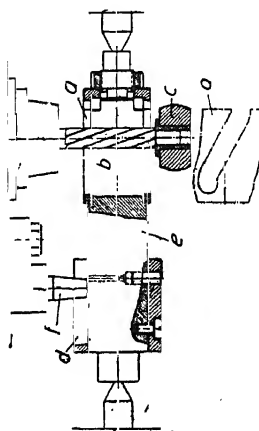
Milling of cylindrical cams open on one side : *a*, workpiece (cylindrical cam) ; *b*, end mill ; *c*, support for end mill ; *d*, template ; *e*, common arbor ; *f*, tracer pin.
